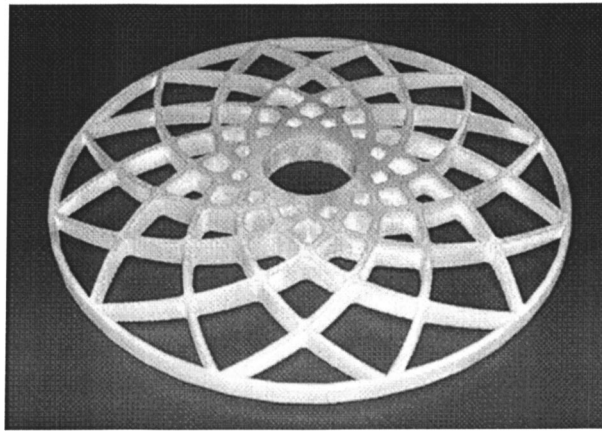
Prototype pure torsion wheel manufactured by free-form laser sintering
